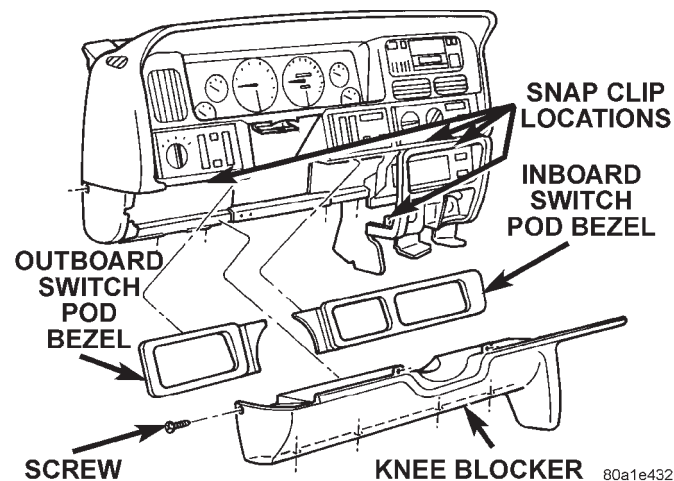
Steering Column Opening Cover/Knee Blocker Remove/Install
